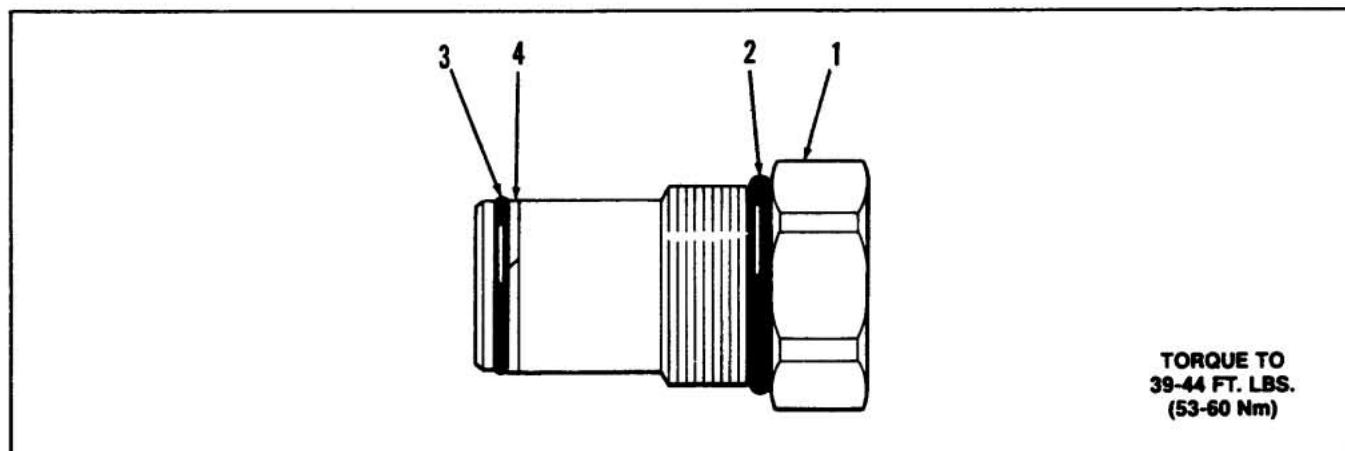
No Relief "NR" Plug (Main and Work Port Relief Valves).
